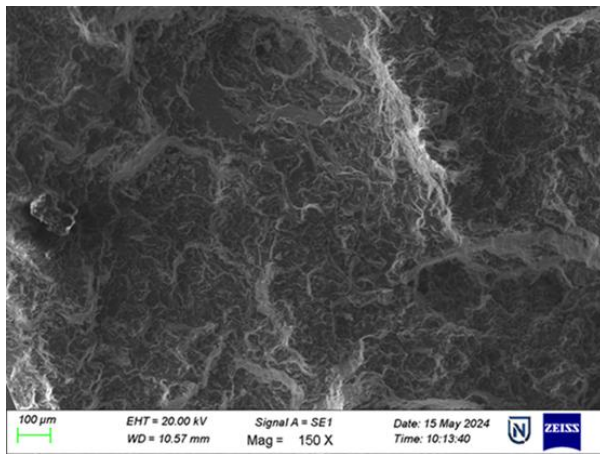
b Fractured surface of Al7075-7% SiC specimen
